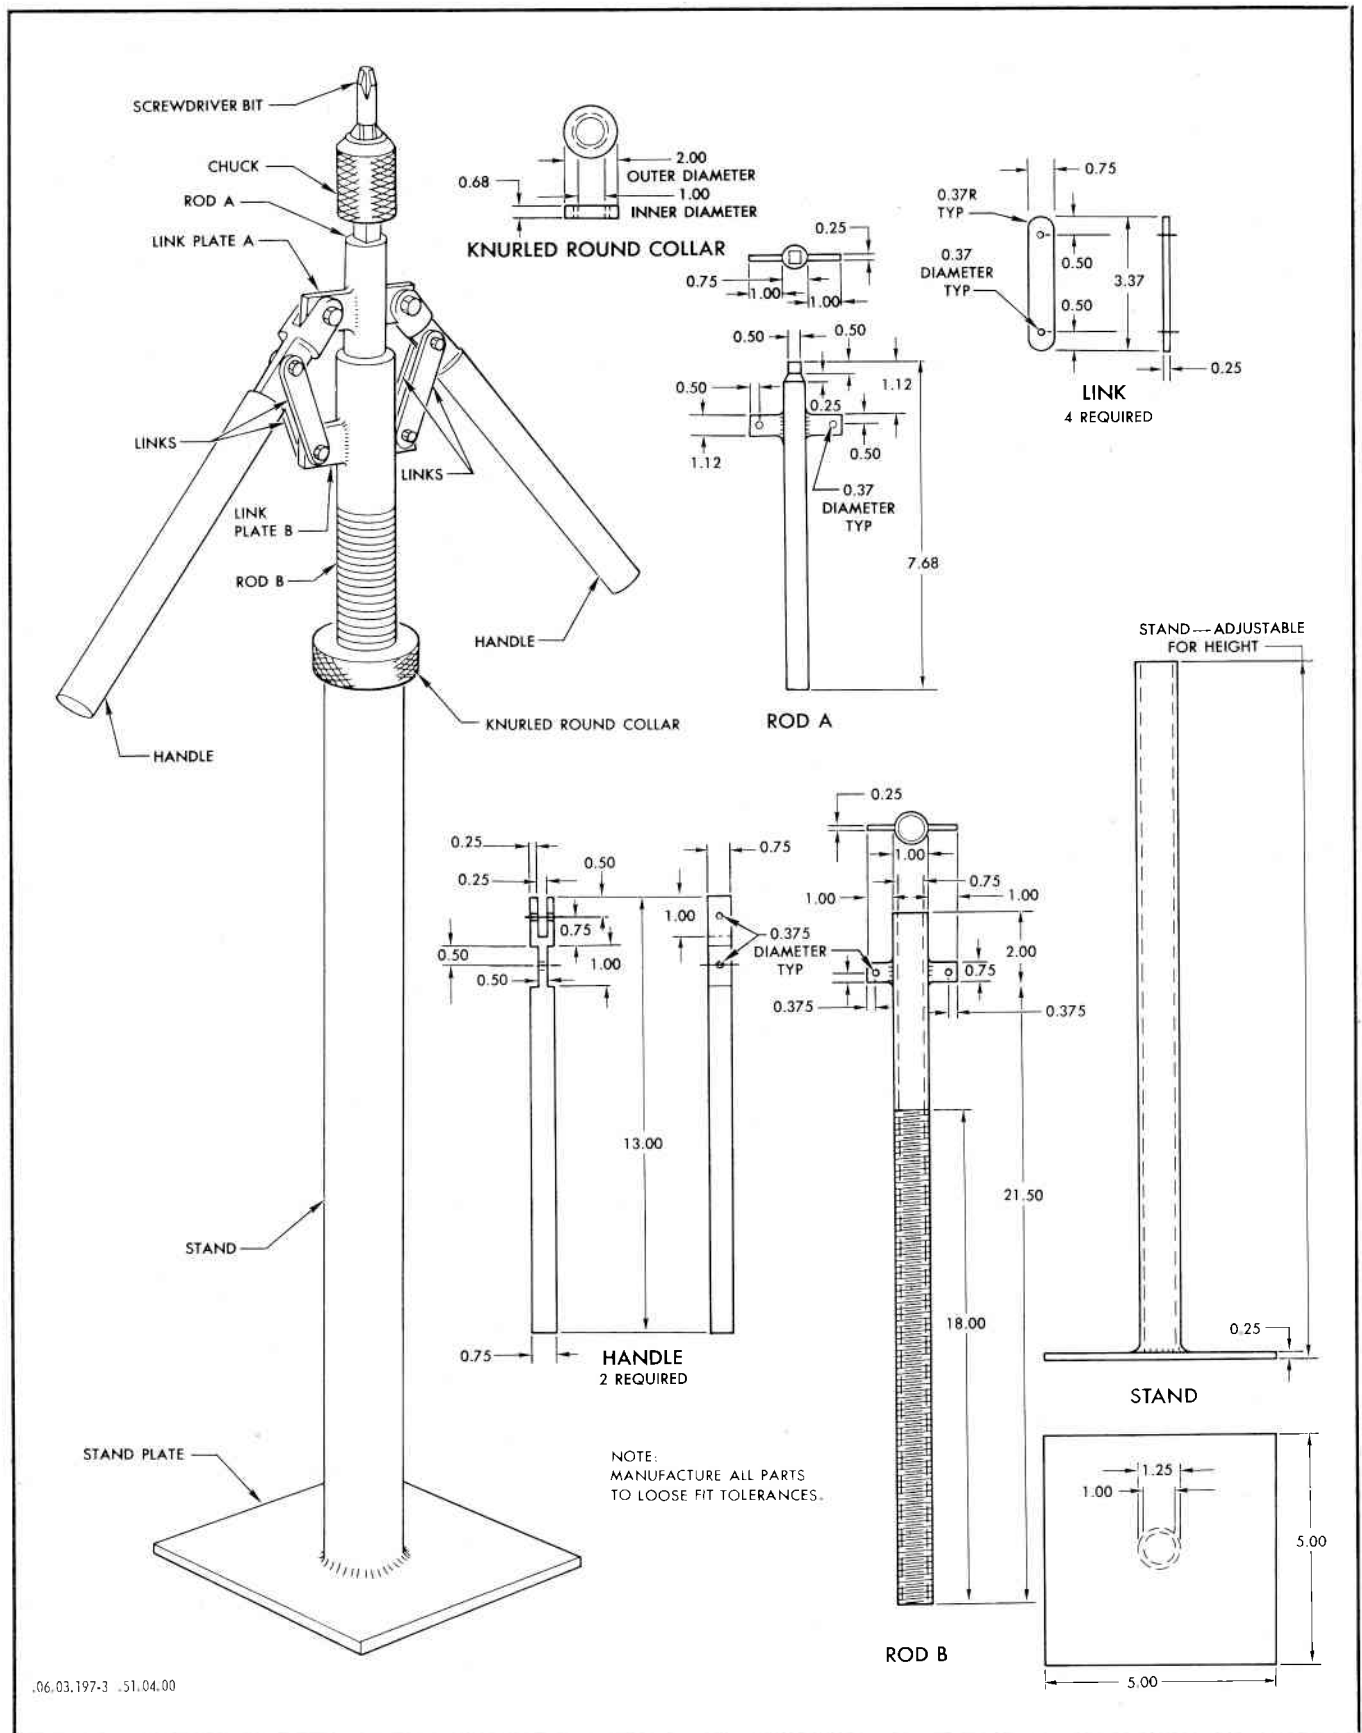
Frozen Screw Removal (Sheet 3 of 3)
